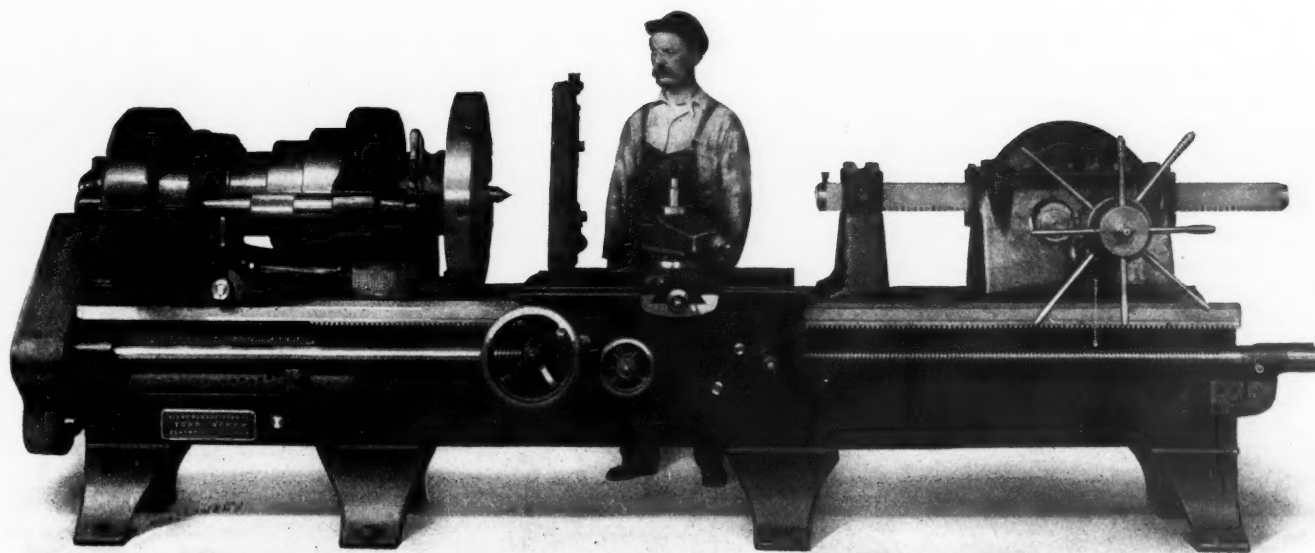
Niles-Bement-Pond 26-inch Double Back-geared Lathe equipped with Boring Tailstock for machining High Explosive Shells
